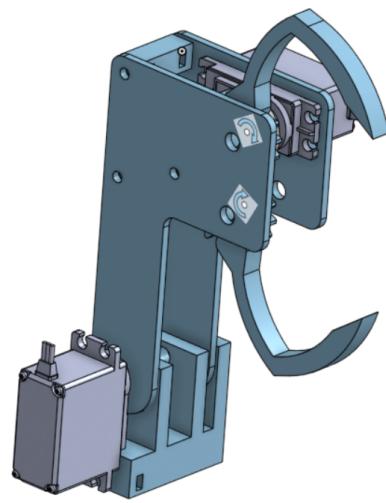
Isometric View of the entire Manipulator Mechanism.
